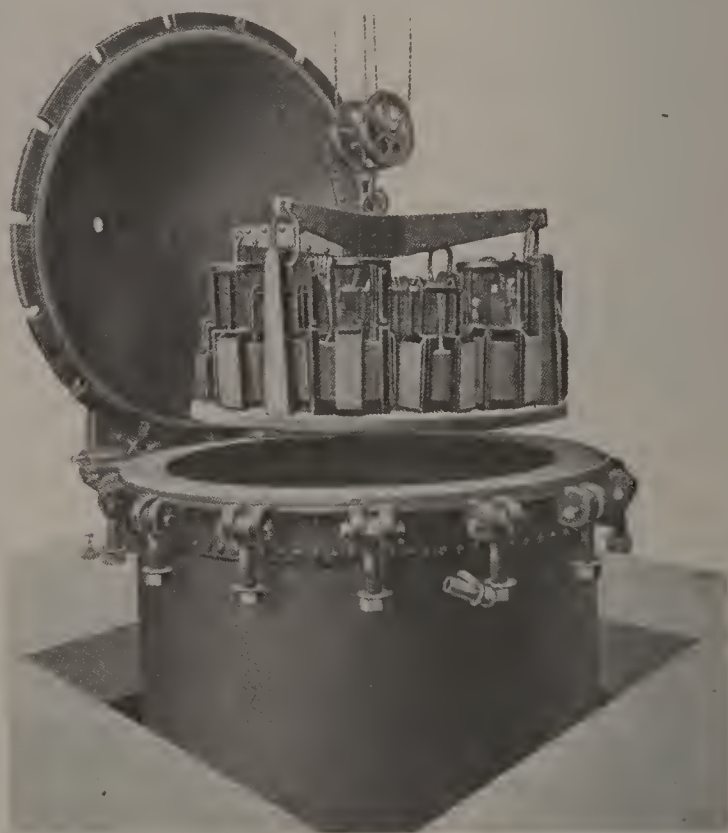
"HAWTHORNE" TYPE T TRANSFORMER COILS AND CORES, ENTERING THE INSULATING COMPOUND IMPREGNATING TANK. WESTERN ELECTRIC CO.
